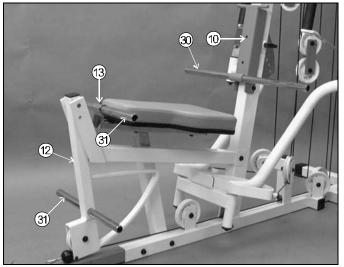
Next, insert one Foot Roll Tube 1 X 16 (#31) into the receptacle located on the end of the Adjustable Seat Frame (#13). Then, insert one Foot Roll Tube 1 X 16 (#31) into the receptacle located on the Leg Extension Arm (#12). Next, insert one Foot Roll Tube 1 X 27 (#30) into the receptacle of the Adjustable Back Pad Bracket (#10), as shown above. Be sure all the tubes are centered at the receptacles from end-to-end.
